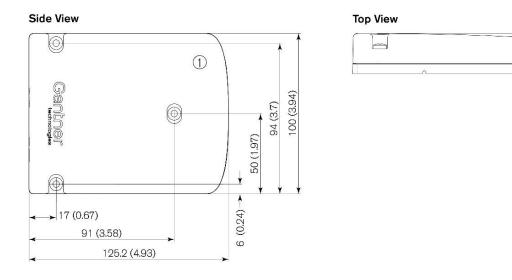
Dimensions of the GAT ECO. Side Lock
